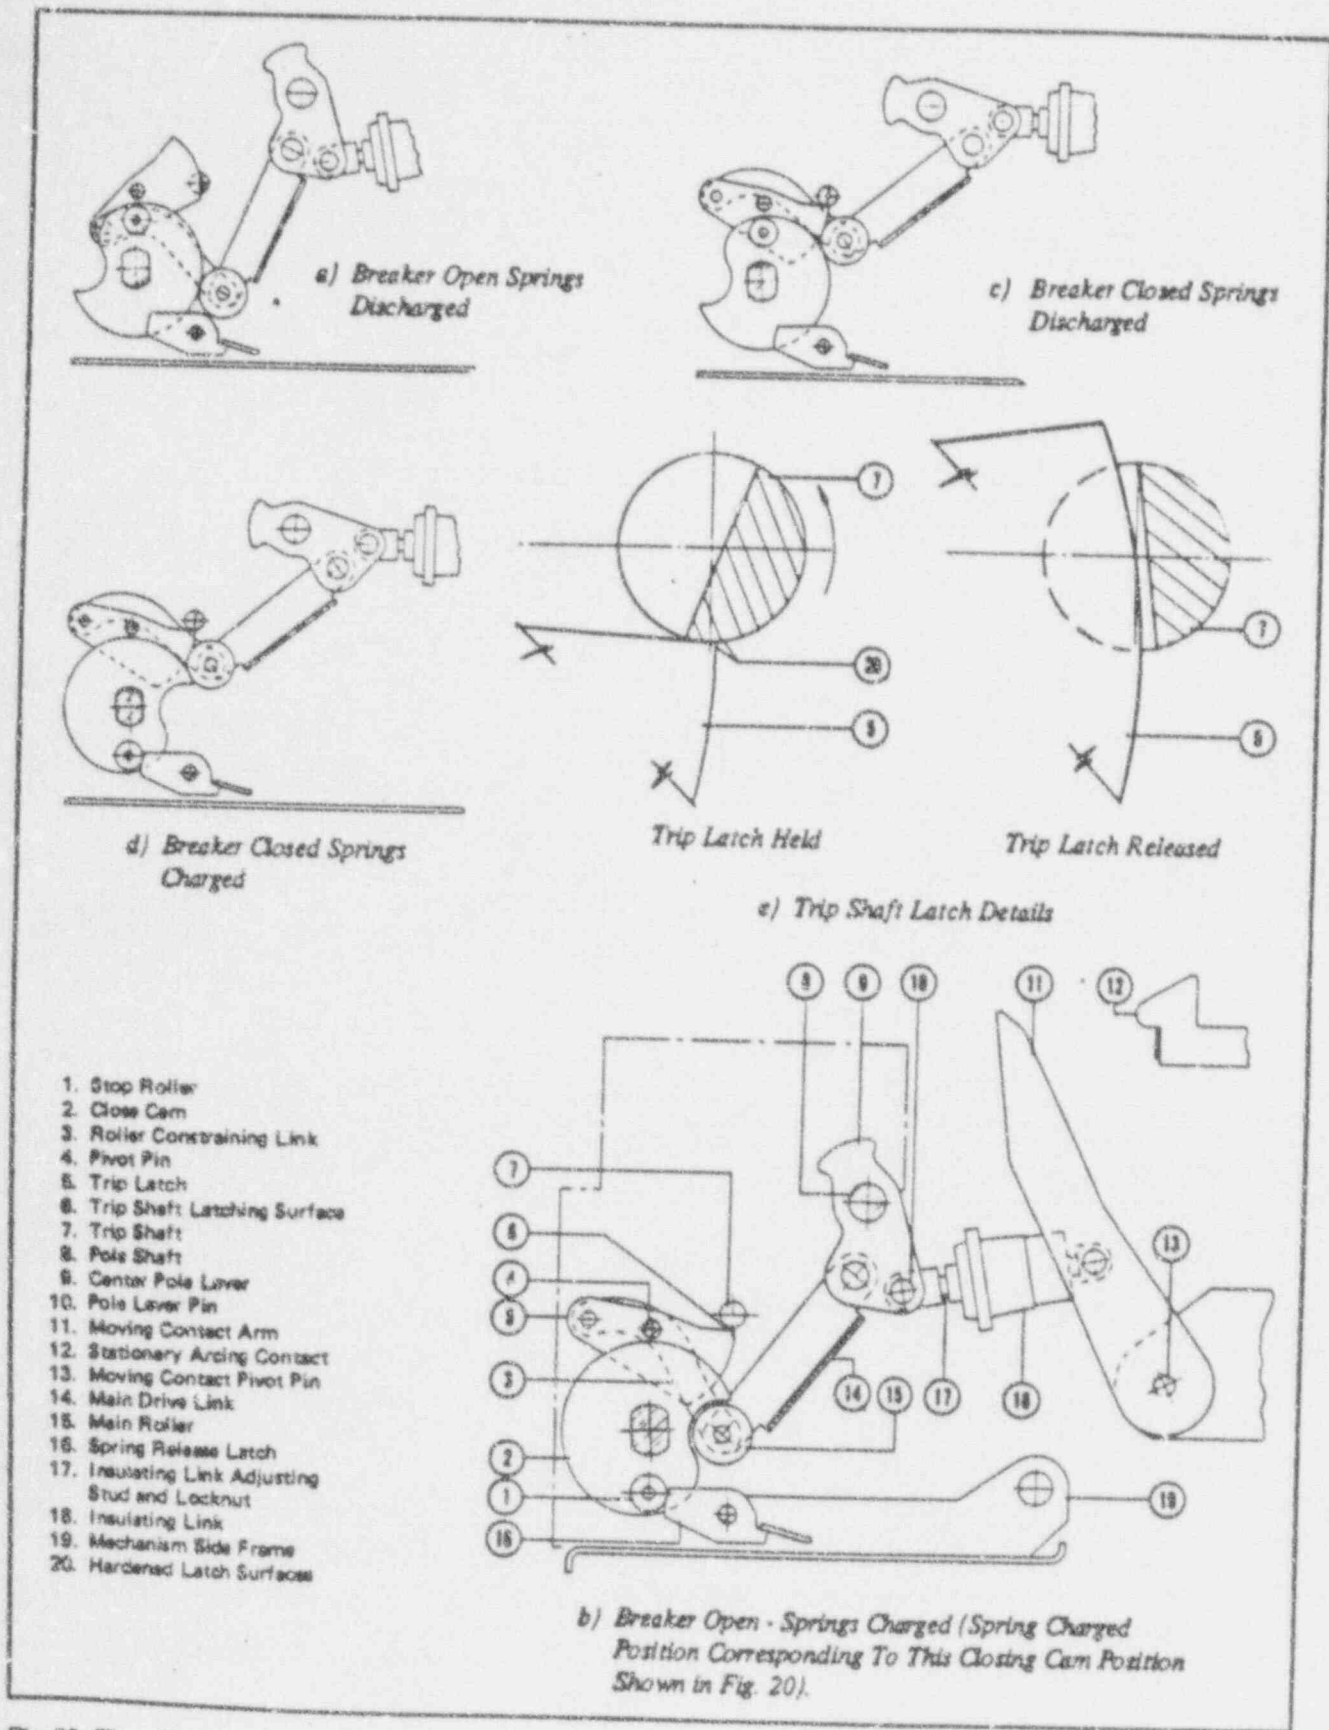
These Sketches Show the Four Basic Positions of Breaker and Linkage with Enlarged View of Trip Shaft and Latch
